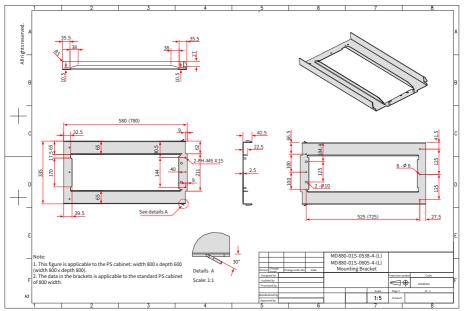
Mounting bracket dimensions of MD880-01S-0538-4-(L)/ MD880-01S-0605-4-(L) (standard)
